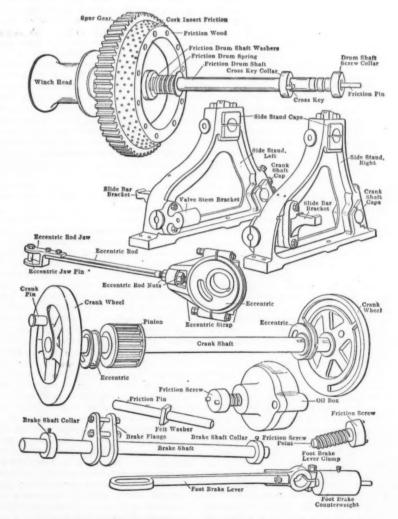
PARTS OF CRANK AND DRUM SHAFTS AND FITTINGS.
